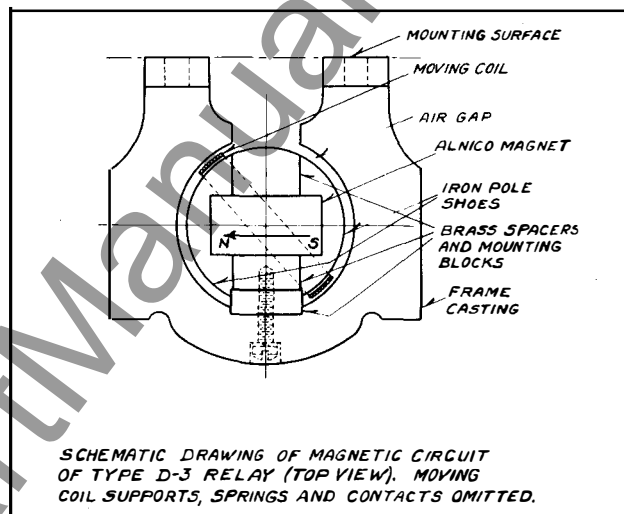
Schematic Drawing of Magnetic Circuit of Type D-3 Relay (Top View). Moving Coil Bearing Supports, Springs and Contacts Omitted.
